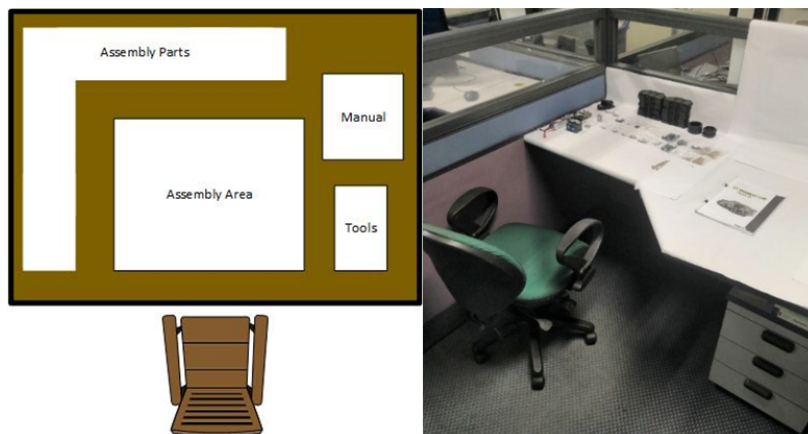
Top view of assembly workbench layout (left) and setup of assembly workbench (right)
